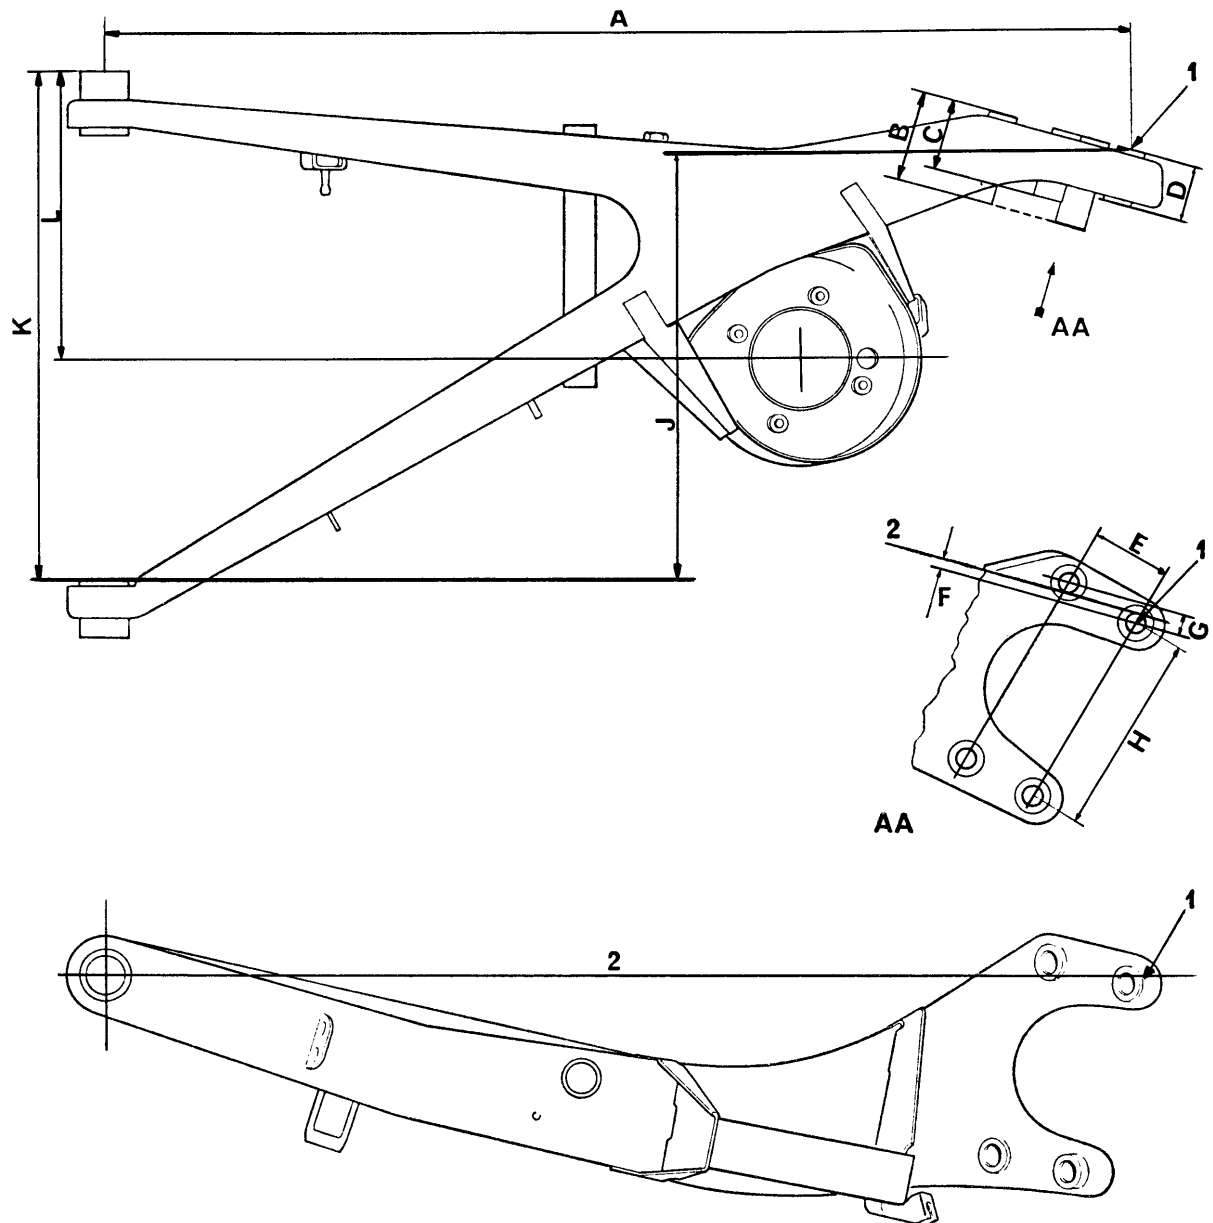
CHECKING DIMENSIONS—FRONT SUB-FRAME
